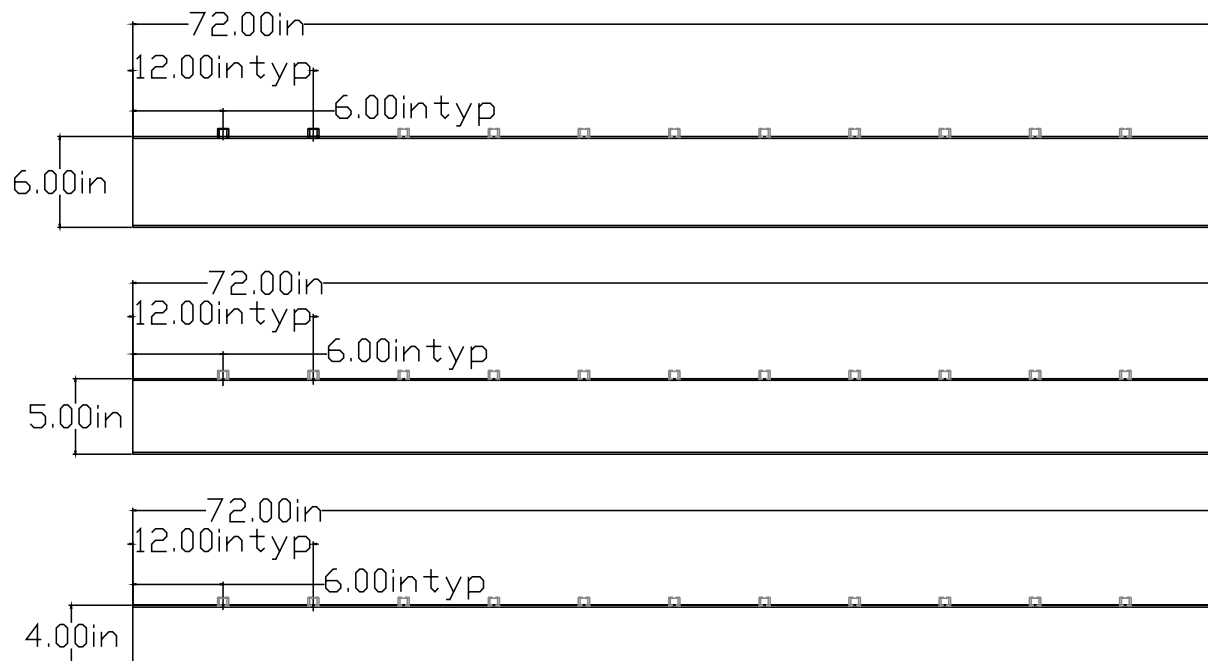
Constant diameter ejector tubes with pressure transducer ports (#3 on assembly drawing).
